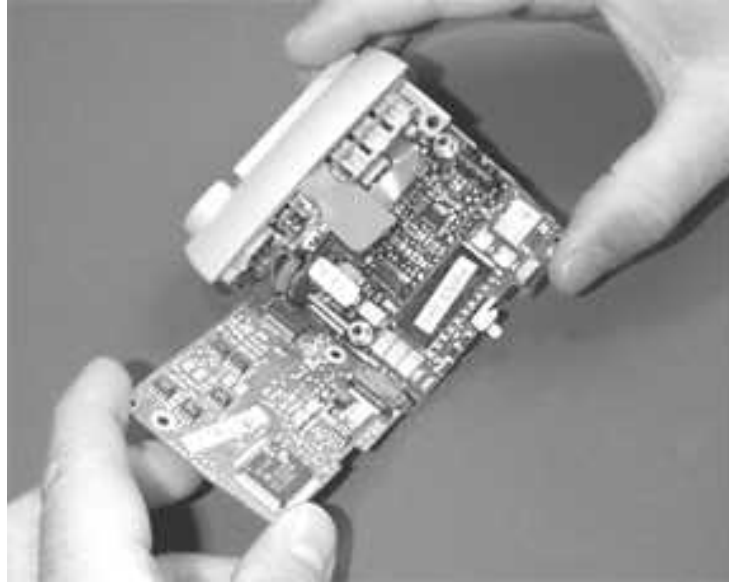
Unfold the SpO₂ Board from the Main PCB
